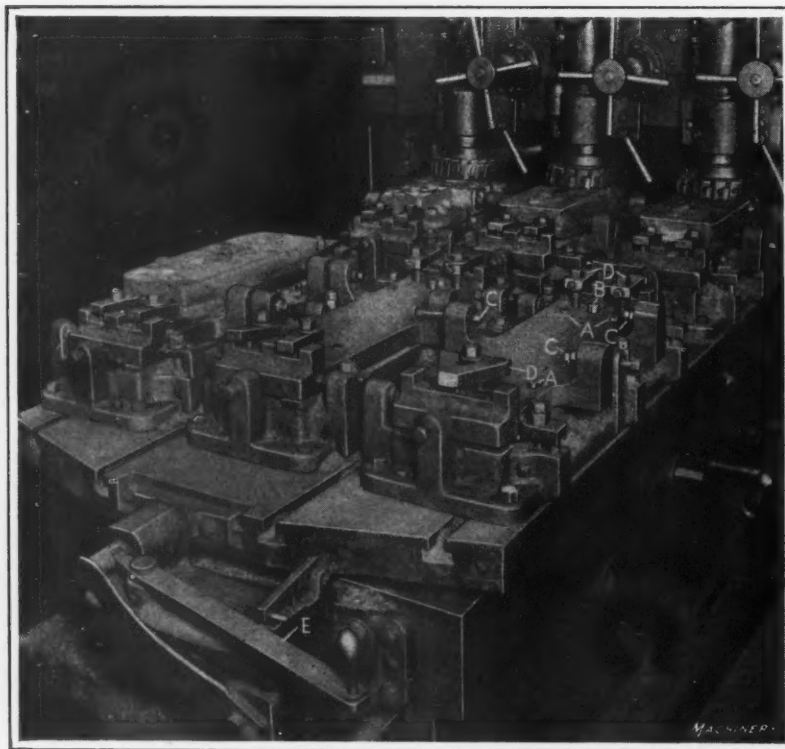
Beaman & Smith Multiple-spindle Milling Machine equipped with an Indexing Table for milling Hudson Cylinder Heads
